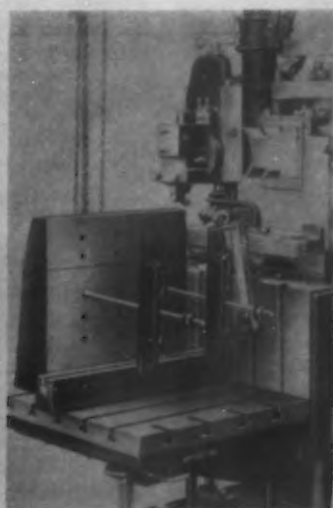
(at Right)—Shaper Attachment for Finishing the Face Bearing of Shoes and Wedges After They Have Been Laid Out and Lined. Fig. 4 (at Left)—Various Sizes of Connecting Rod Brasses May Be Held While Machining the Strap Fit. Fig. 5 (Center)—Special Chuck for Holding Driving Box While Machining Shoe and Wedge Fit. Quick set-up of the work is a feature
